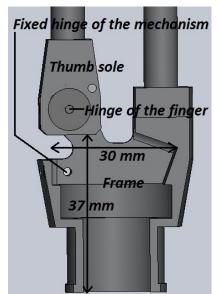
The frame and thumb sole of Tweezer are the dimensional constraints.
